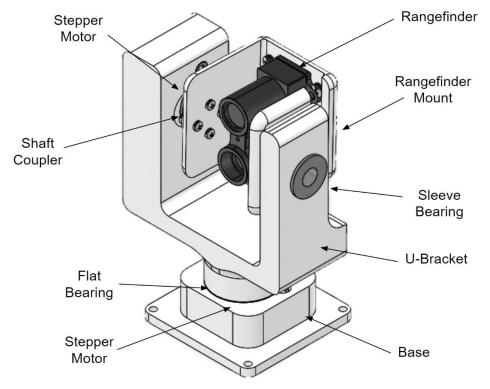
ASSEMBLY OF LIDAR HOUSING SHOWING COMPLETE SYSTEM
